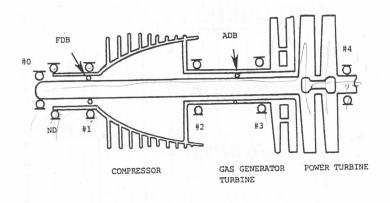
Two Spool Aircraft Turbine Engine with 8 bearings⁹
